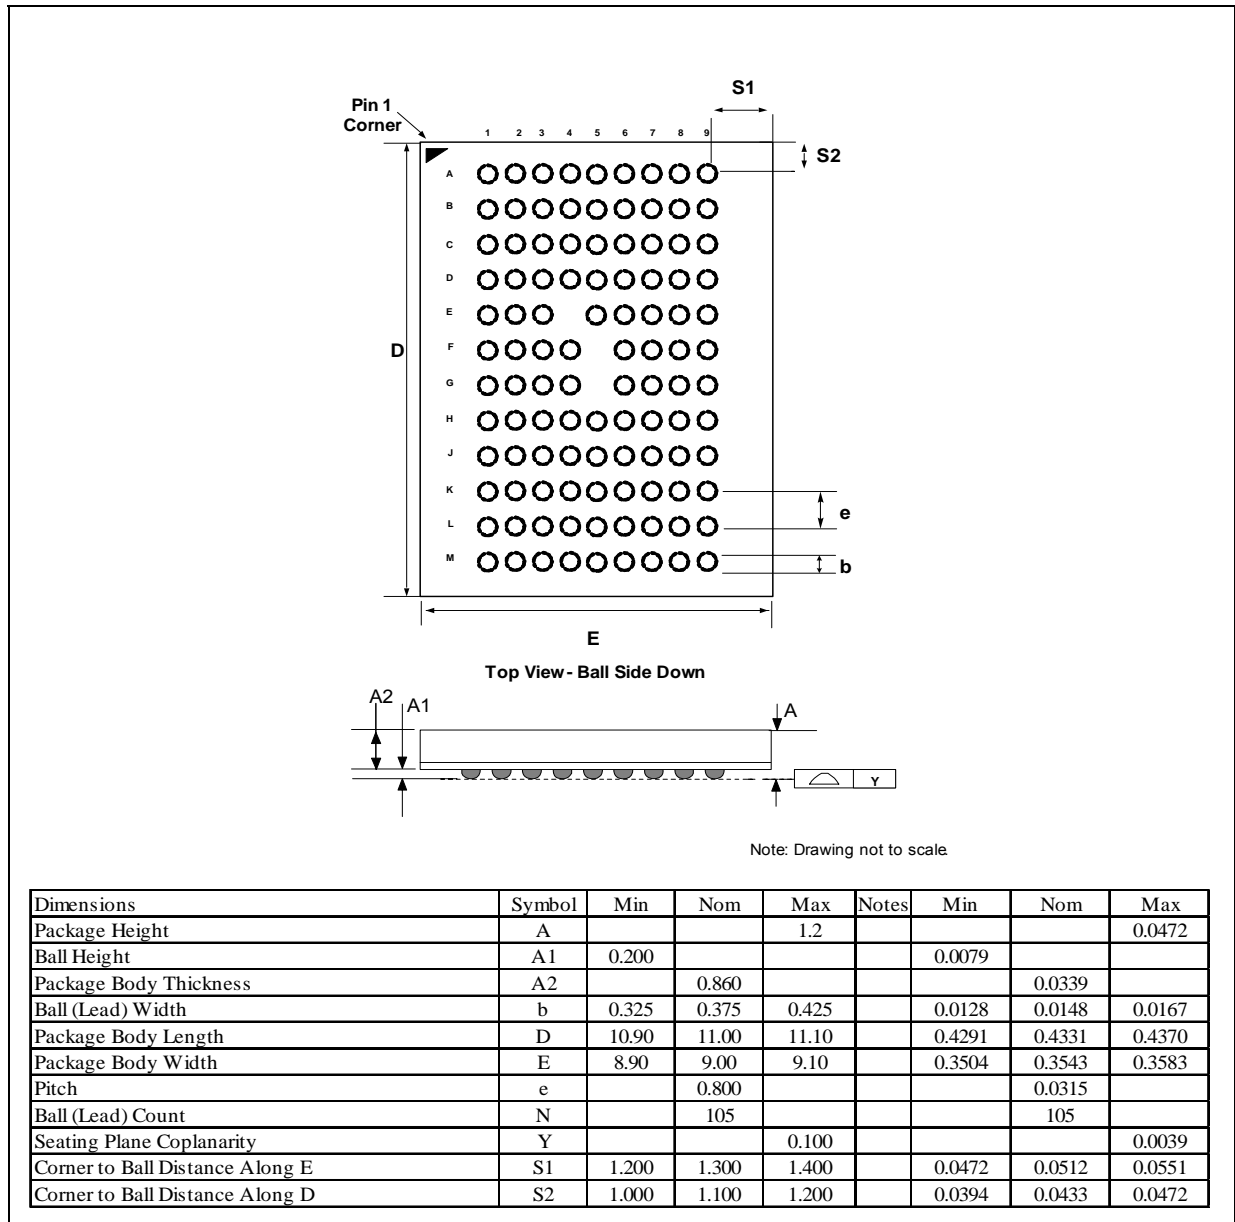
Mechanical Specifications for x16D (105 balls) Package (11x15x1.2 mm)
